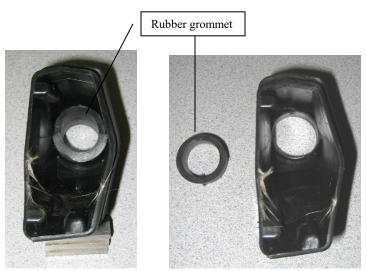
Inside view of end cap identifying rubber grommet installed location (Left) and appearance after removal (Right).
